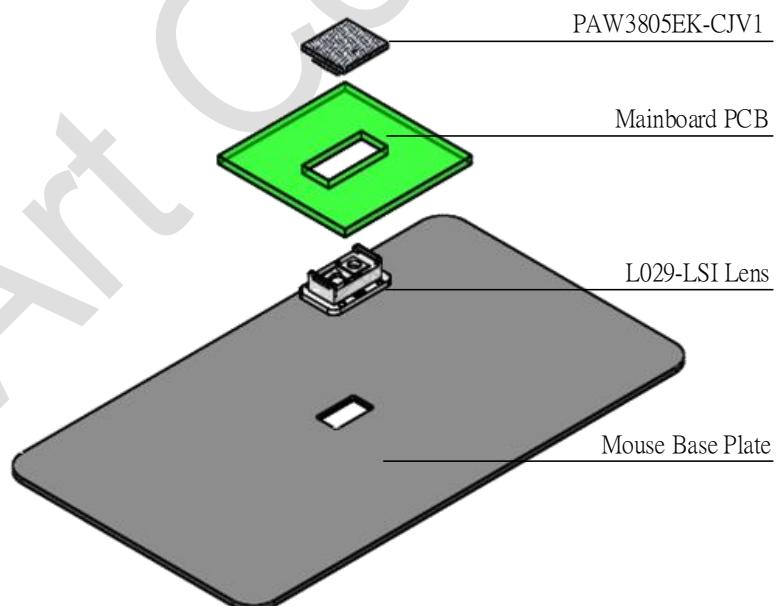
Exploded 3D Assembly View of Chip, Lens, PCB and Base Plate
